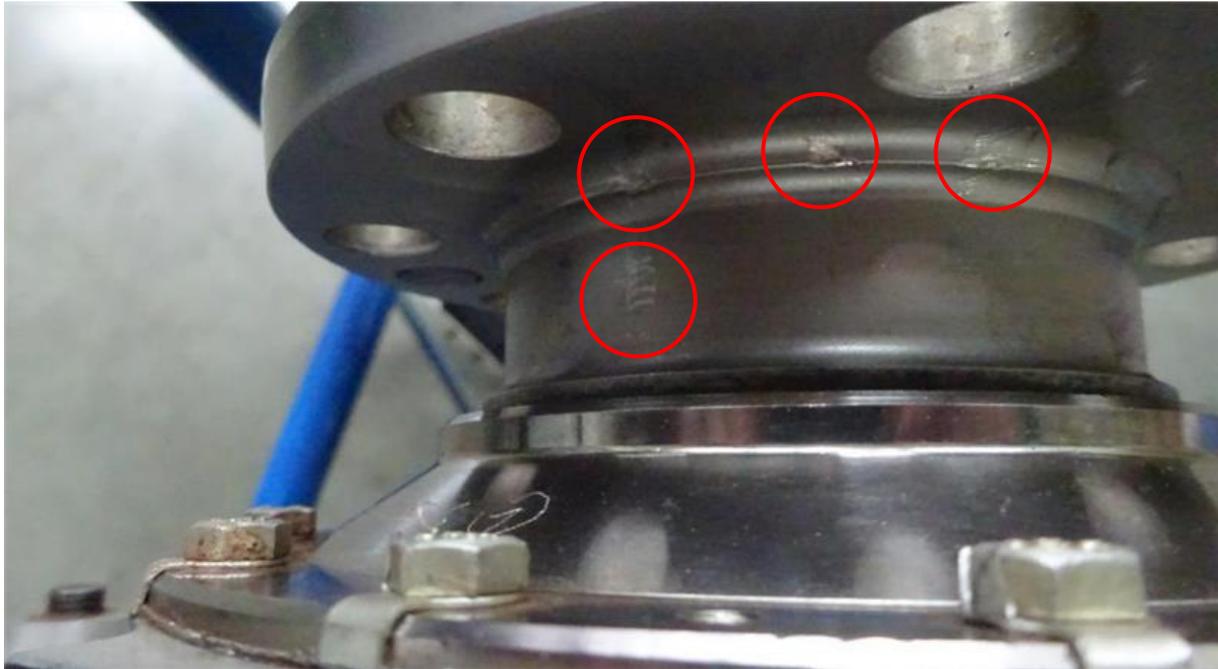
Possible damage to the propeller shaft, when using tooling improperly.
